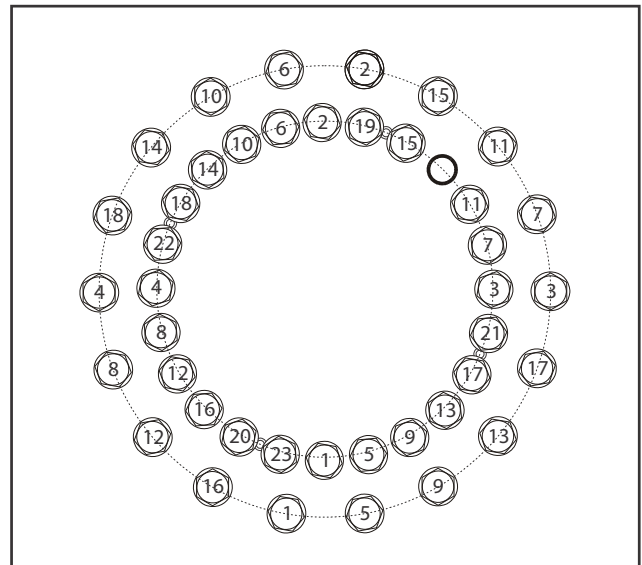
Swing Bearing (Jing Wei) Torque Sequence
